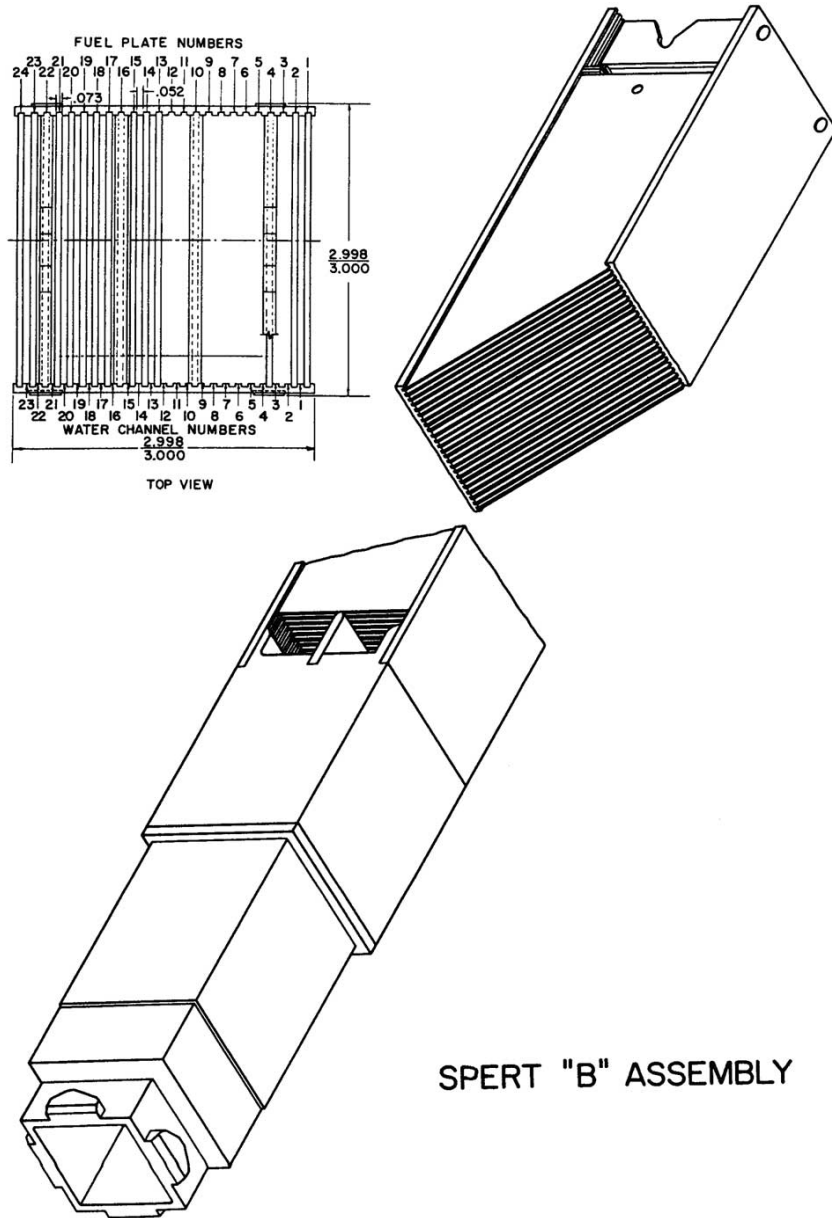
Spert Type-B Fuel Assembly (Ref. A-10)
